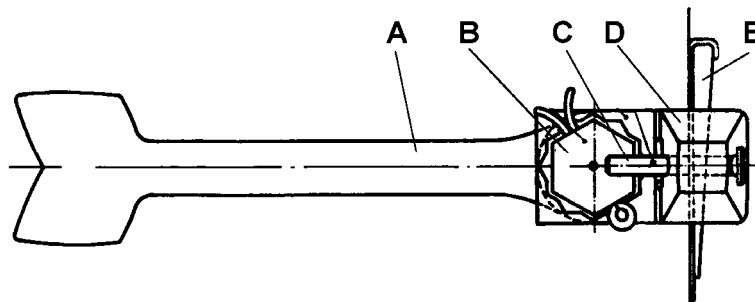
, Clamp locking device, locking clamp, tongue block (top view)
